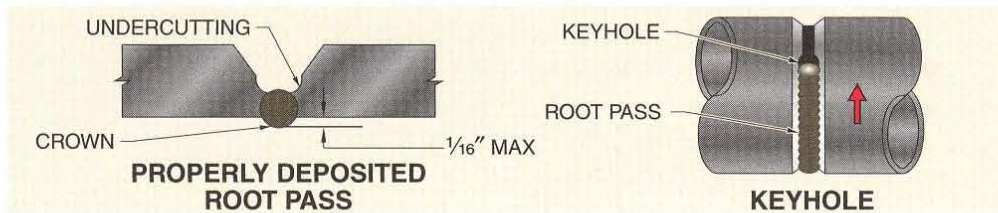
A properly deposited root pass forms a crown on the inside of the pipe. A keyhole is formed if the root pass is stopped and must be filled when welding starts again.
